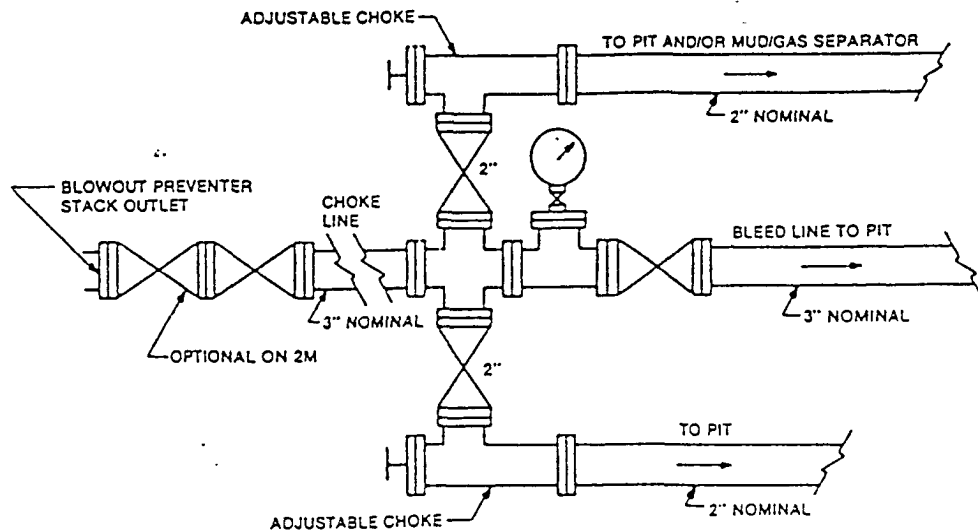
Typical choke manifold assembly for 2M and 3M rated working pressure service — surface installation.
